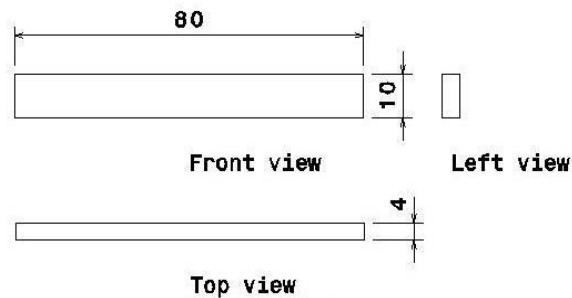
Test specimen for flexural test or three point bending test in accordance to ISO 178. [6] (All dimensions are in millimeter)
